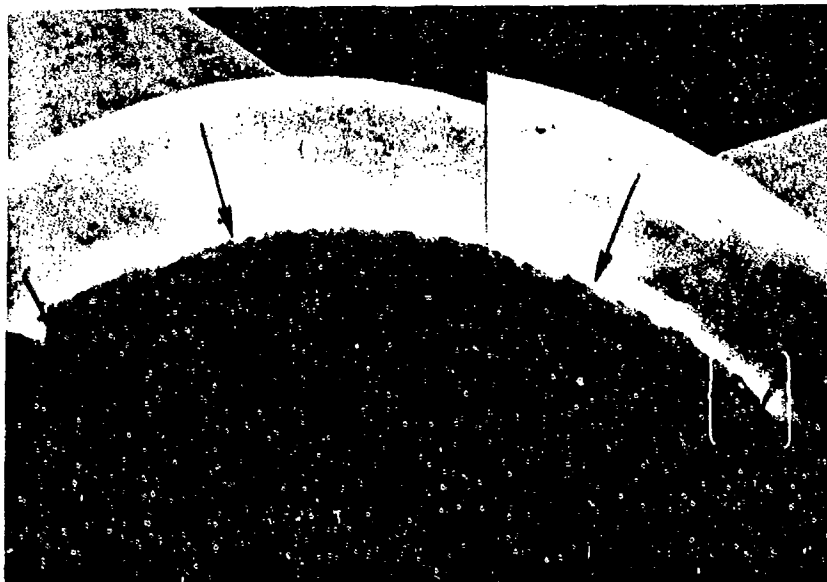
Overall photograph of the quick fill bellows assembly. The crack is in the small bellows (top).
